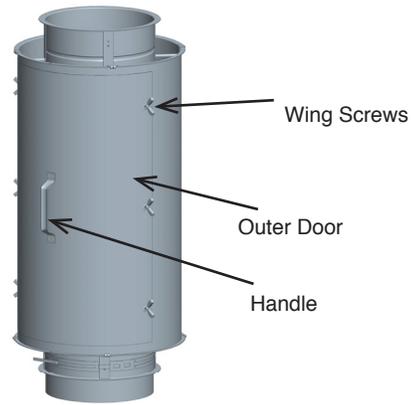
No Tool Inline Access Door ADL24 or ADL36
